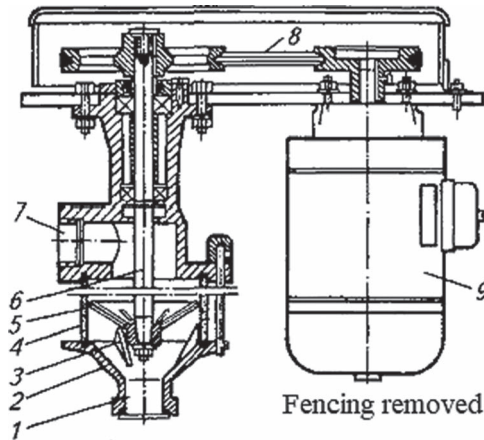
Scheme of the homogenizer: (1) outlet; (2) bottom; (3) ledge; (4) housing; (5) stirrer; (6) vertical shaft; (7) inlet; (8) V-belt transmission; (9) electric motor.
